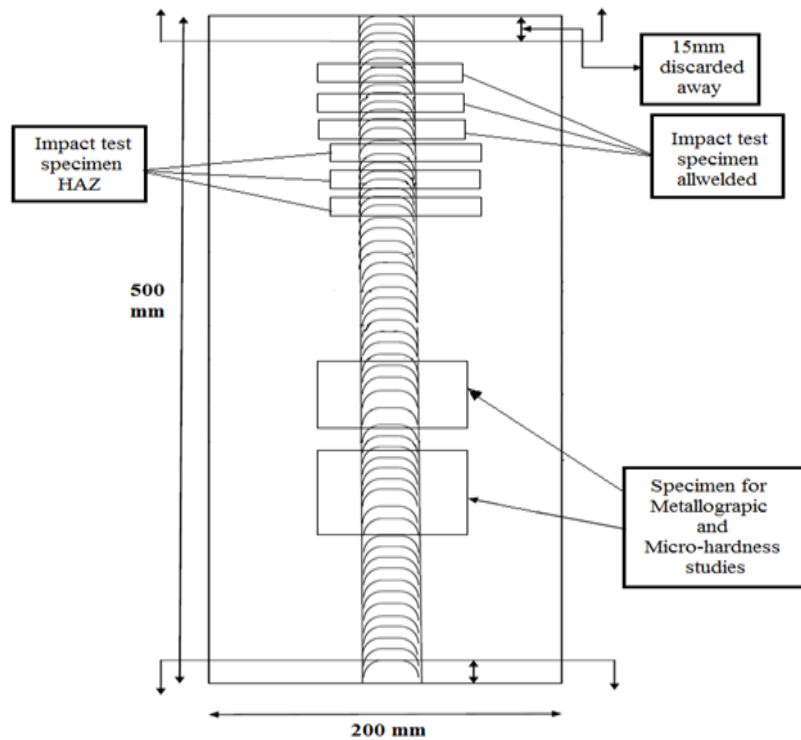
Schematic illustration of the specimen sampling plan from the butt welded joints
